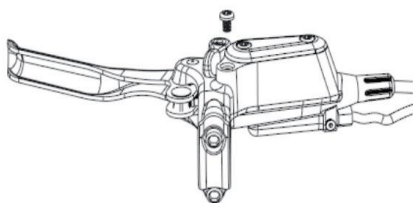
Remove the oil inlet screw from the disc brake master cylinder
